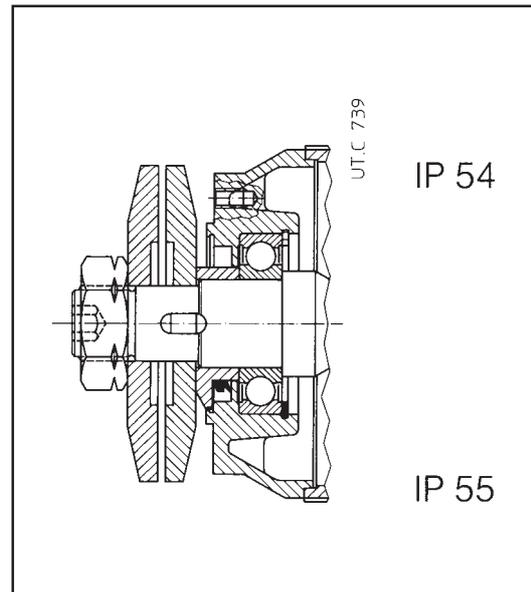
Blade holding kit mounting HPE, HPEV
